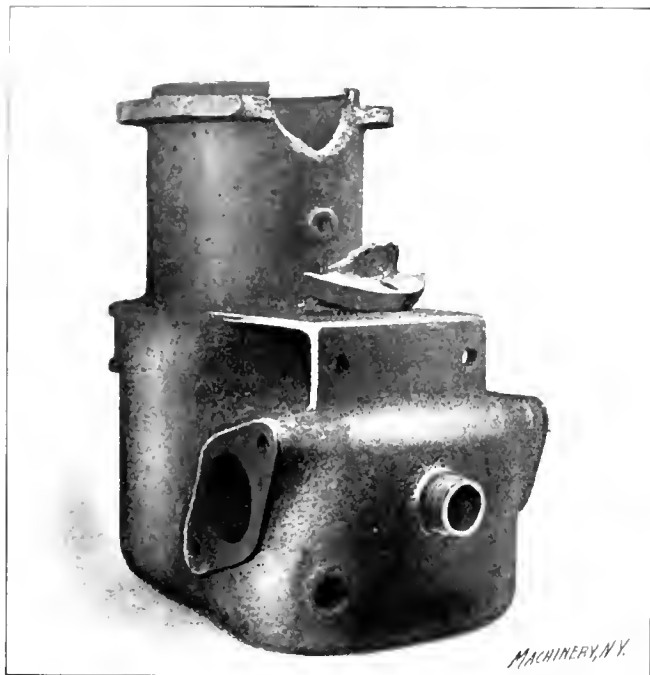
Broken Cylinder to be repaired by Autogenous Welding.
